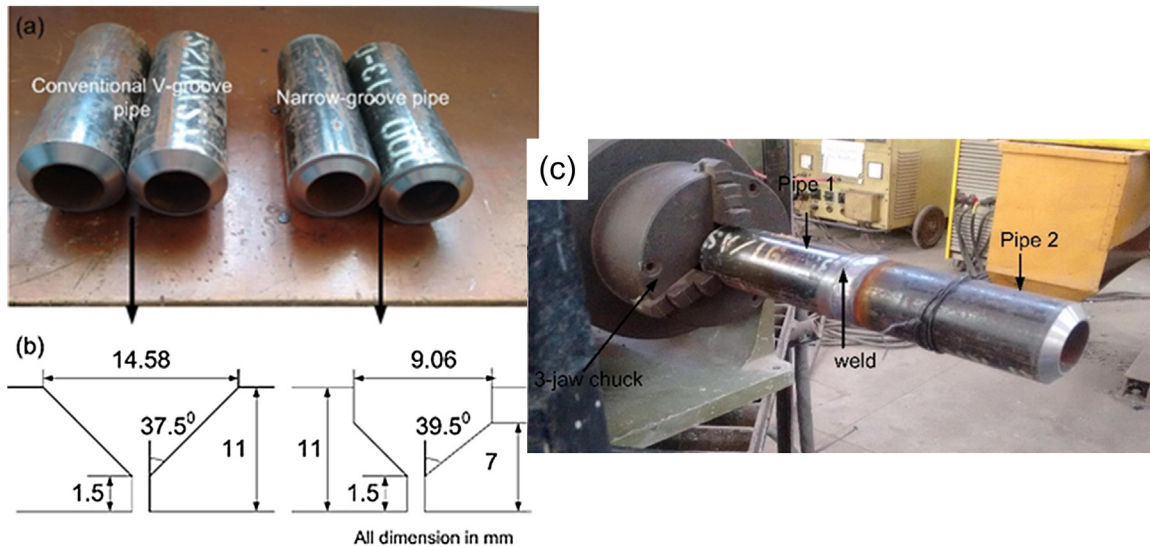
(a) Grooved pipe, (b) V-groove and narrow groove design, (c) welding set-up with welded pipe.
